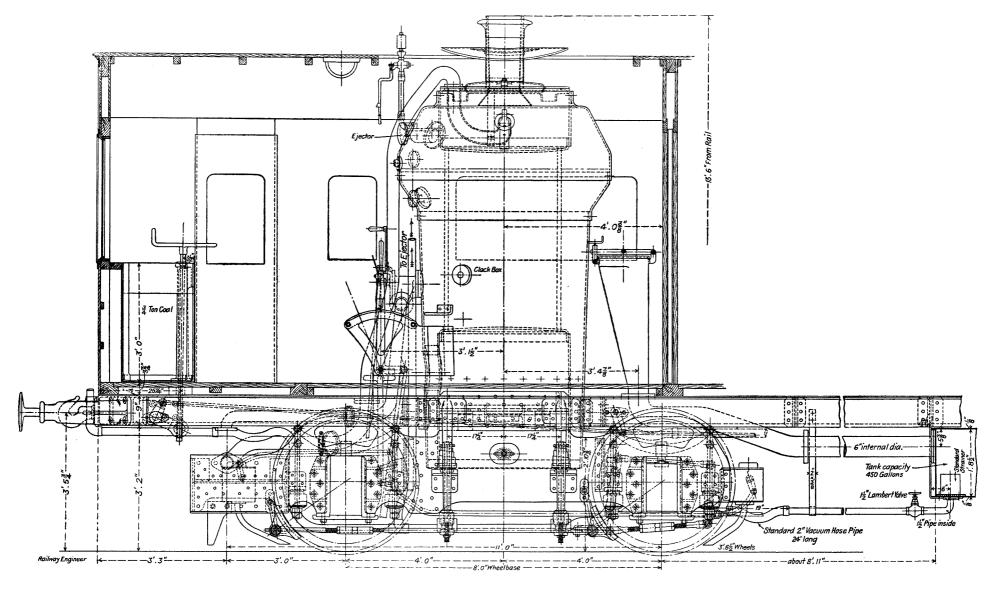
Arrangement of Steam Motor.— Sectional Elevation.
